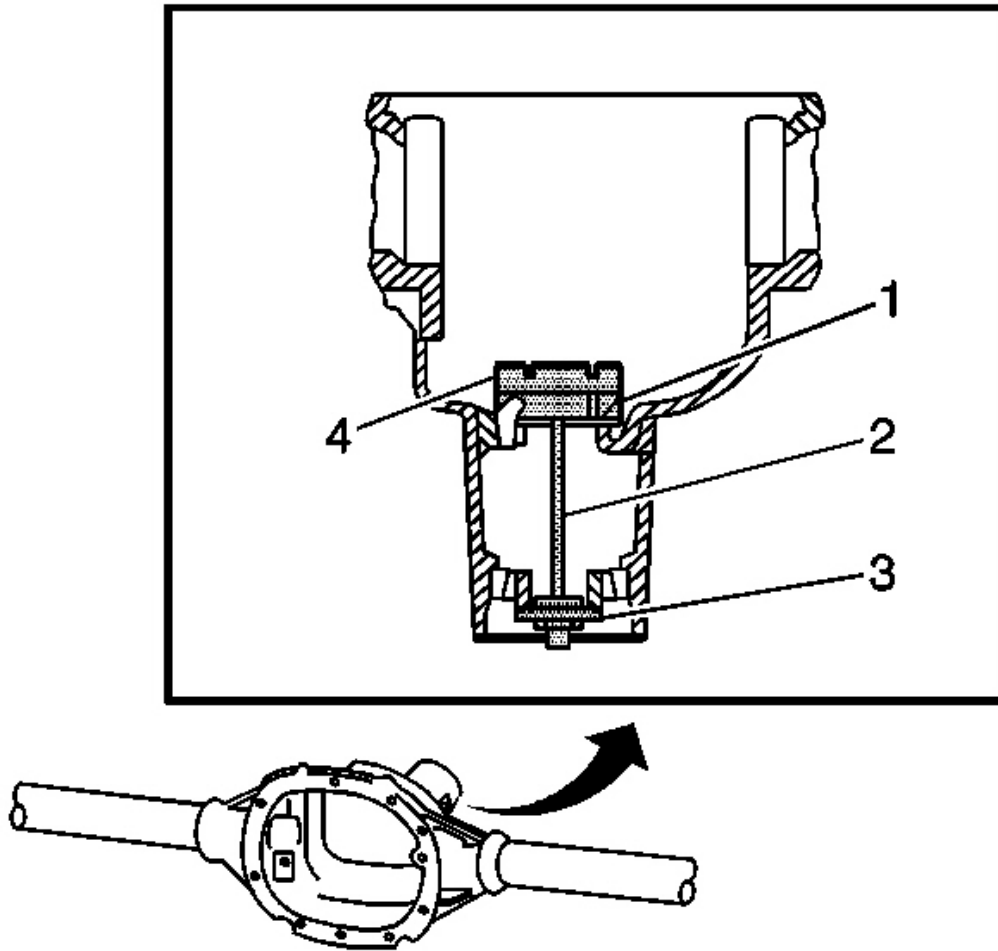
Assembling J 21777-35, J 21777-43, J 21777-42 & J 45230
